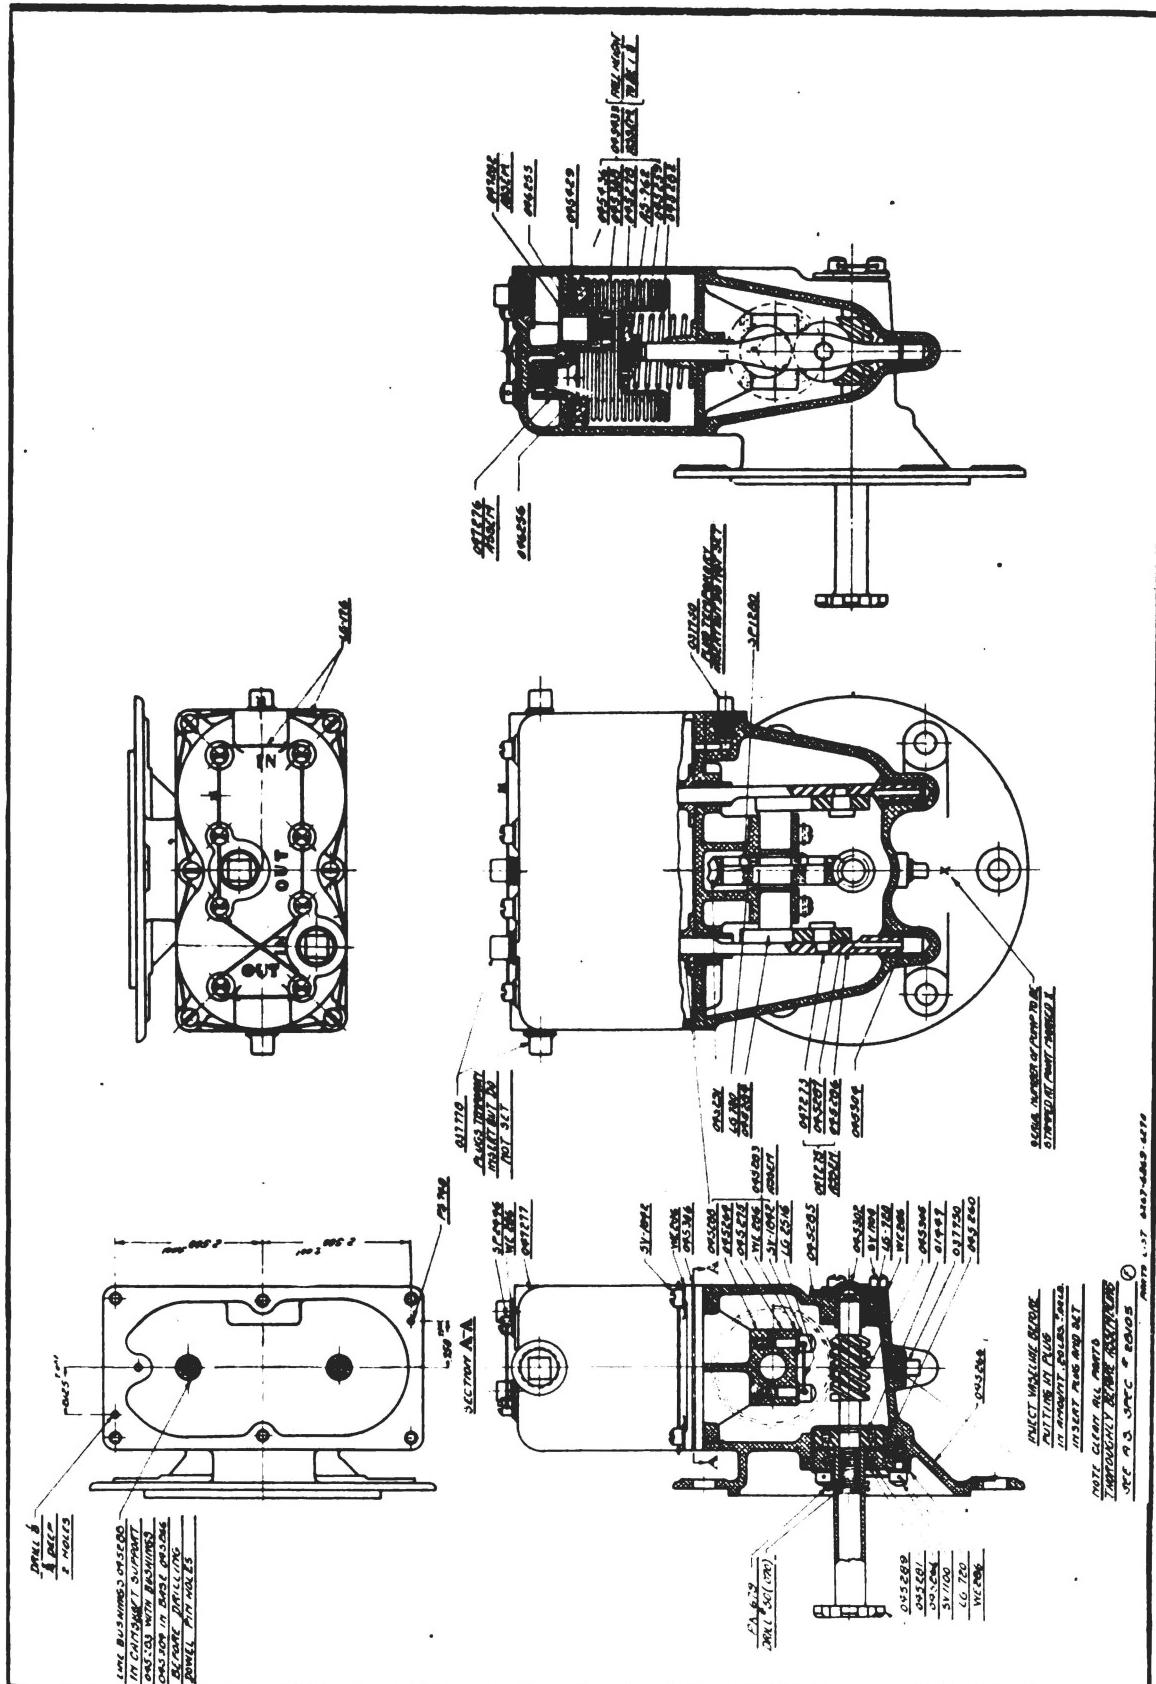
Three-view and sectioned assembly drawings of Liberty "12" pump.
